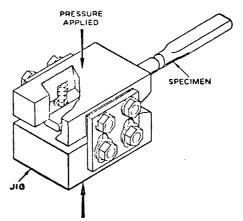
Squeezing Jig for Flattening Ends of Full-Size Tension Test Specimens
